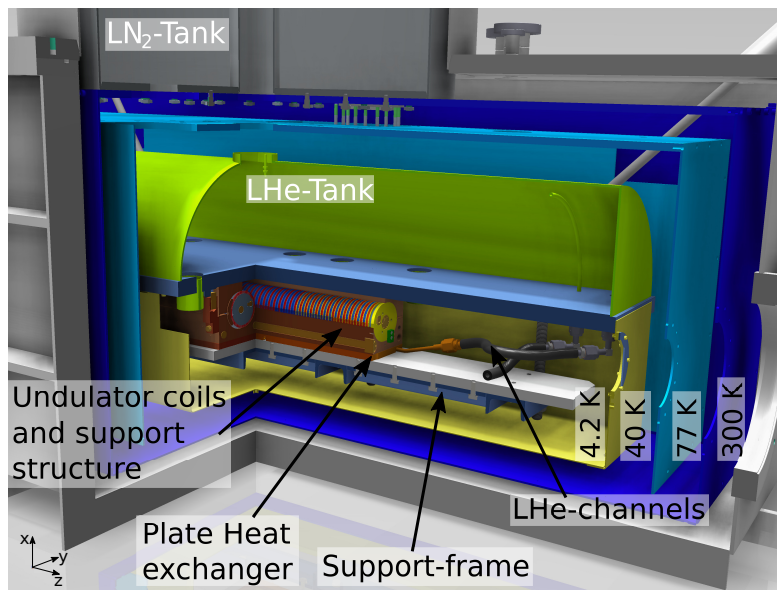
3D-view of the horizontal cryostat assembly with a 1/4 cut off for visibility [61].
